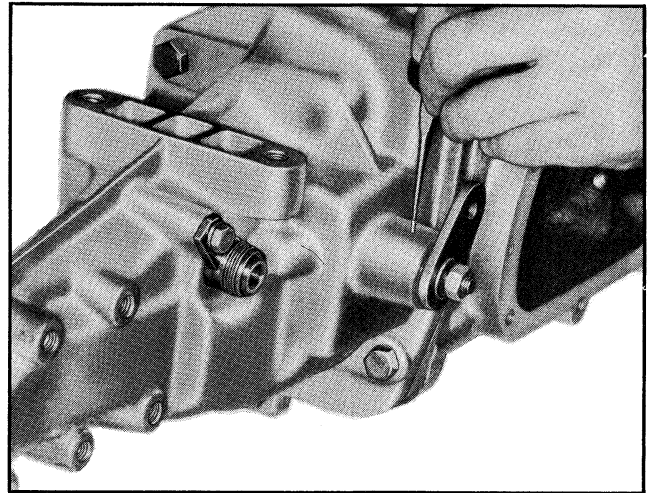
A-15 Removing Shifter Shaft Lock Pin
